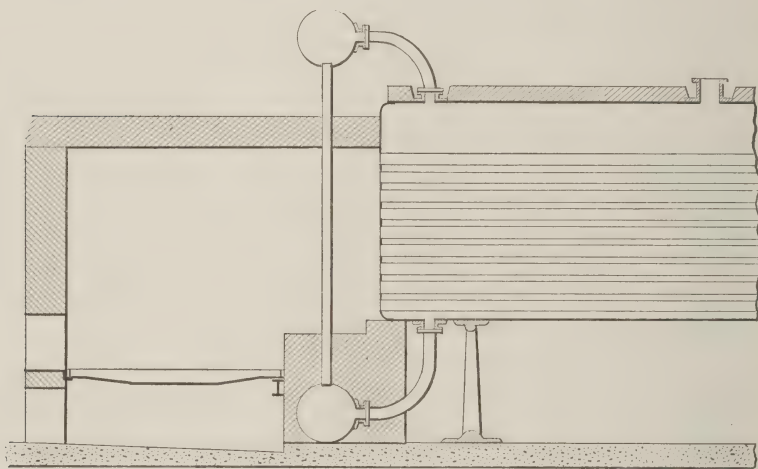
SHOWING WATER LEG TO LOWER TEMPERATURE OF GASES IMPINGING ON TUBE SHEET
